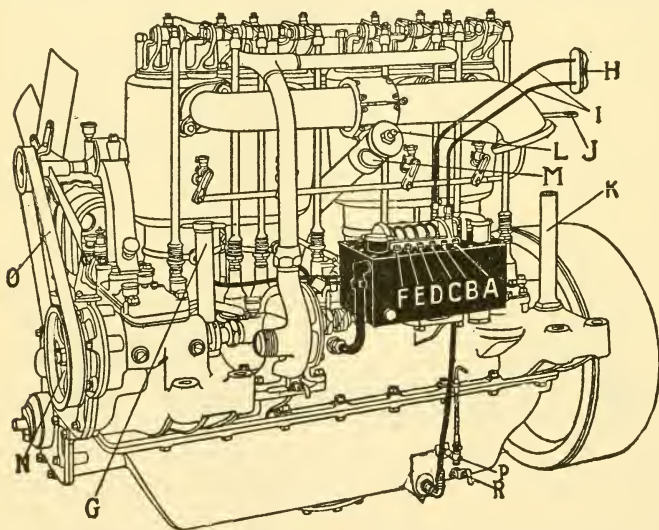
Splash and force feed lubrication system as applied to the Pope-Hartford engine. The force feed oiler is bolted to the crank case and driven by an extension of the water pump shaft. The oil supply is drawn from a reservoir in the bottom of the crank case. This oil, less the amount delivered by the small pumps through the six feeds, F, E, D, C, B, A, passes through an overflow pipe, B, into the cam shaft chamber of the crank case, lubricating the cam shaft bearings, cams, rollers and holders. From here the oil is led through holes so located as to always maintain the correct level in the cam shaft chamber, to each of the main bearings, thence it finds its way into and maintains a constant level in the crank pit for connecting rod lubrication and the general splash lubrication of the engine. The surplus oil overflows through a stand pipe and strainer, D, into the reservoir, from which it is again sucked up into the oiler and used again as above described. The crank case reservoir is filled through G; oil poured through this opening first fills the crank pit, then overflows through a stand pipe and strainer until it reaches the level of the gauge cock, H, being strained three times after leaving the crank case before being used again. The pipes, I, lead to sight feed, H, on dash; the cocks P and R indicate, respectively, highest and lowest levels.
